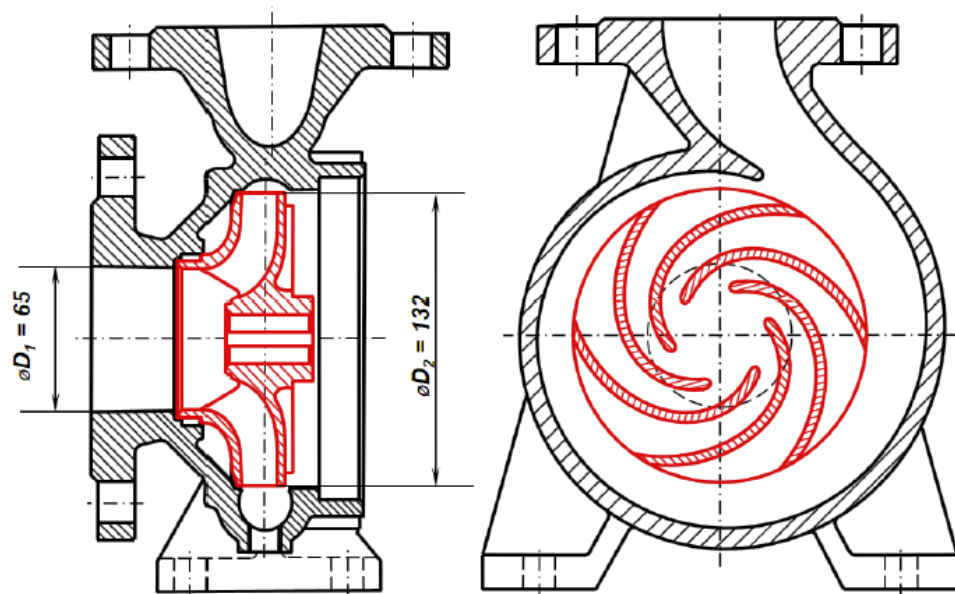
Cast iron impeller in spiral housing and parameters of pump [11]
